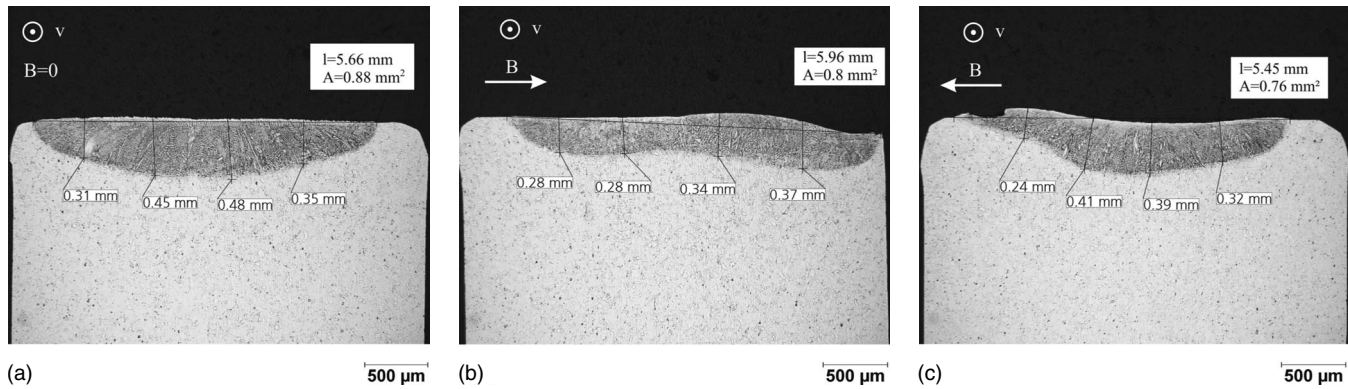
Weld seam cross section of an inconel sheet (4 mm thick) if welded without (a) and with a magnetic induction B of two different orientations [(b) and (c)]. The radius of the laser beam at the surface of the sheet is $550 \mu\text{m}$. The direction of the welding velocity v is indicated by \odot . The circumference l and the area A of the cross section are given as well as the depth at different positions. The cause of the changes in the cross section is explained in the narrative.
